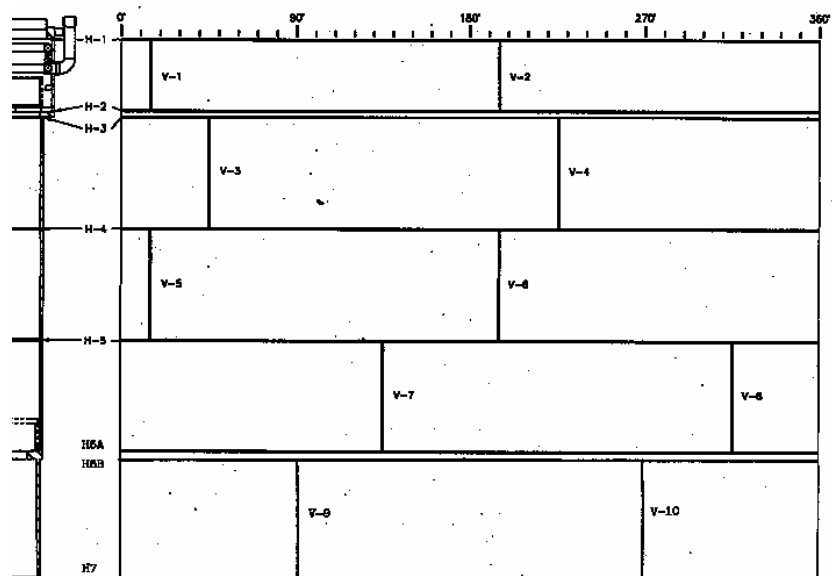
Welds Arrangement for Laguna Verde Core Shroud.
